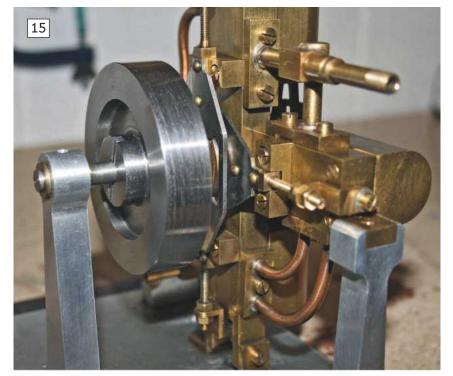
Behind the cylinders on the Harmonique engine, you can see two further scotch cranks, which operate the piston valves to admit or exhaust the steam. This arrangement is a real work of art and simply fascinating to watch in operation.
